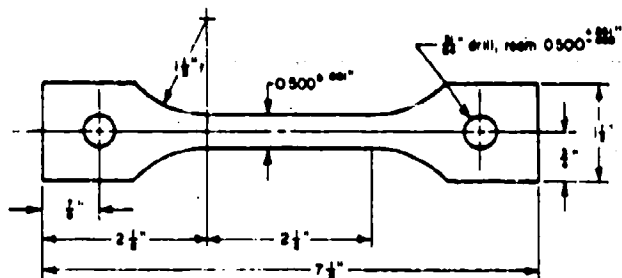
SHEET AND THIN-PLATE TENSILE SPECIMEN
